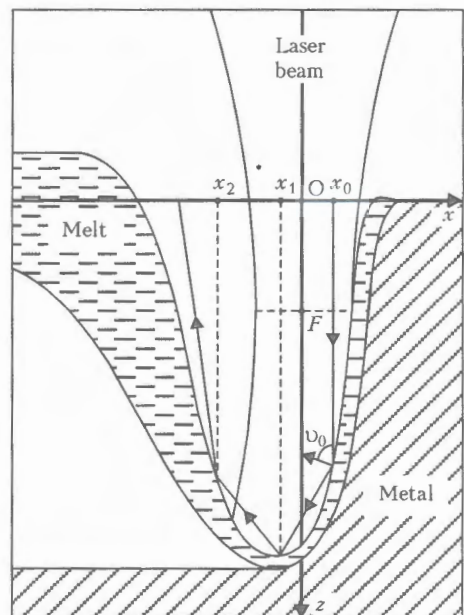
Schematic of laser beam-keyhole surface interaction in laser welding
